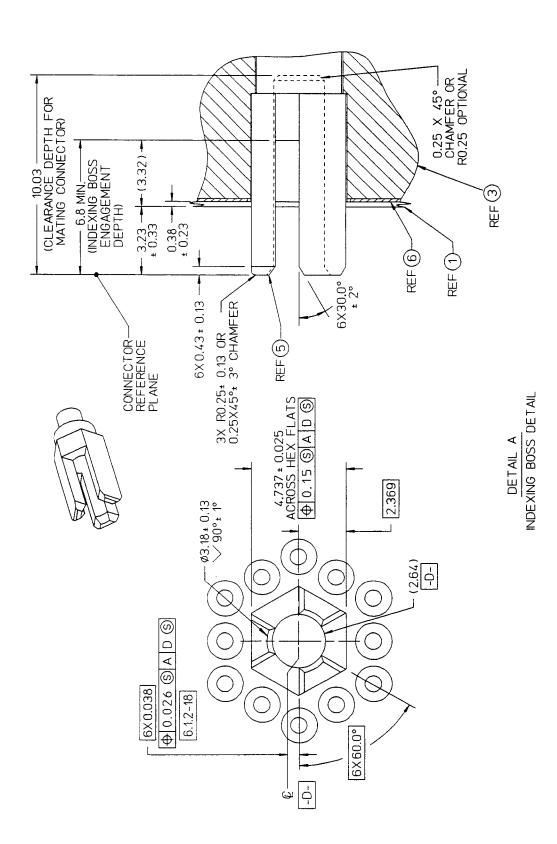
CONNECTOR, MODULE MSIB SHEET 2 OF 2
